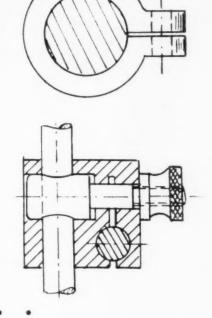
(Top Right) Simple form of split clamp. Fig. 28. (Bottom Left) Split Clamp for cast, forged or pressed bodies.
